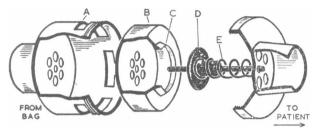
A, Valve-housing with expiratory slots. C, Valve-seating on piston. D, Non-return valve. Piston.
